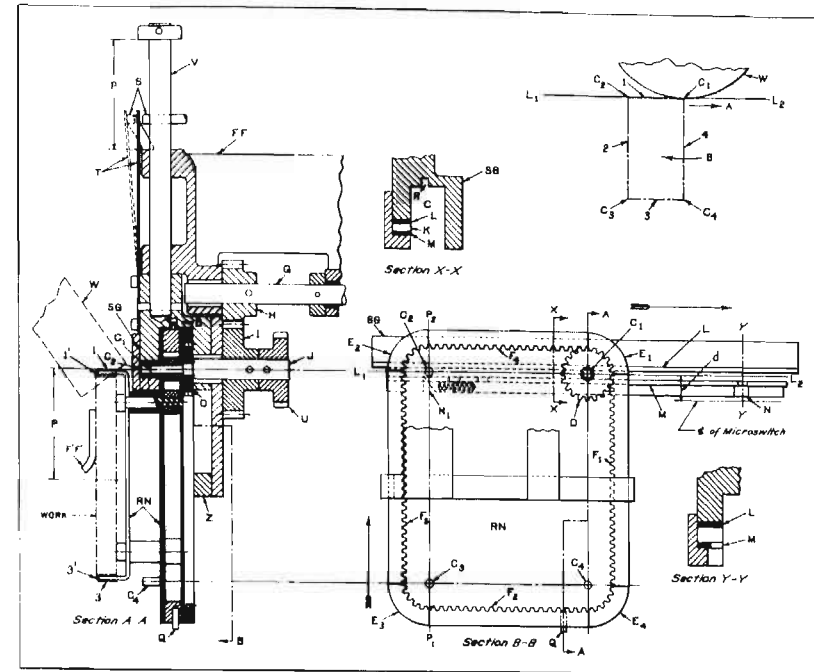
Rotating and sliding mechanism designed for automatically polishing the periphery and faces of rectangular frames.
